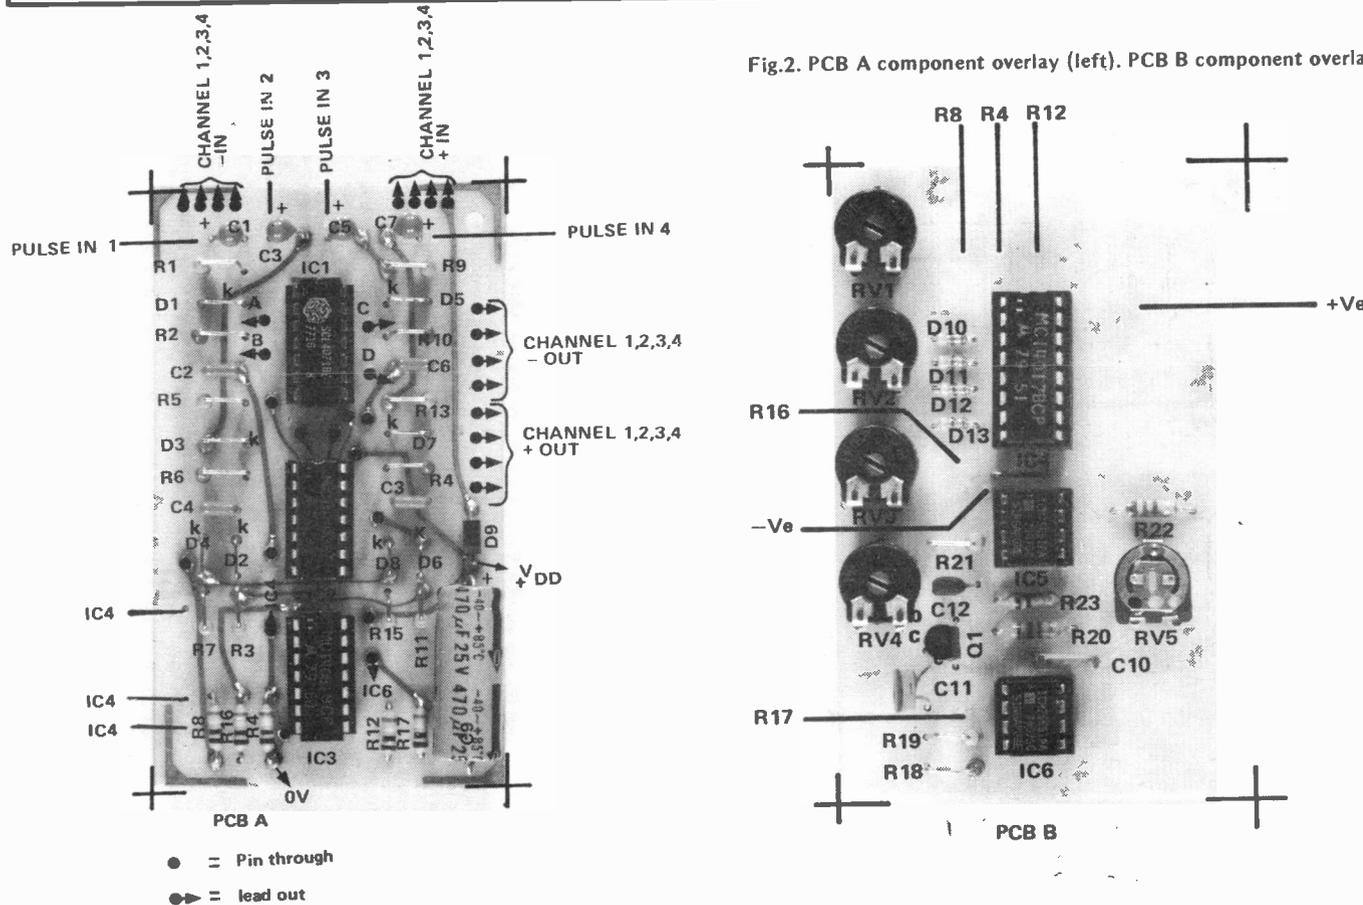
PCB A component overlay (left). PCB B component overlay (right).
